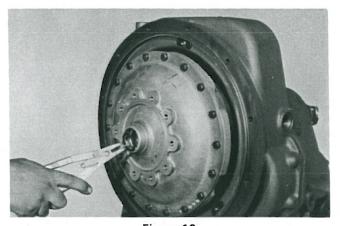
Through bore plug hole, remove turbine retaining ring. See Figure 10-A.
